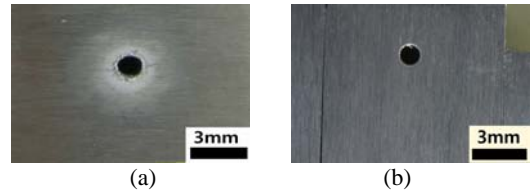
EDMed Holes ; (a) Machining with original condition, (b) Machining with cover plate
